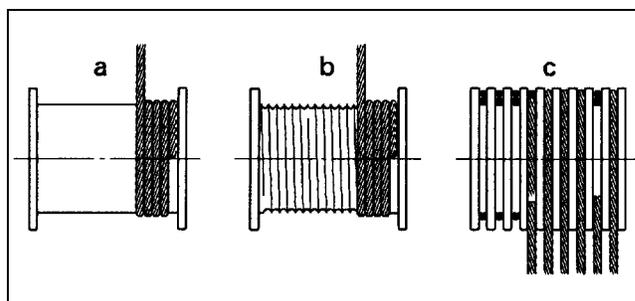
Drum types: (a) smooth, (b) grooved, and (c) disk-layered
